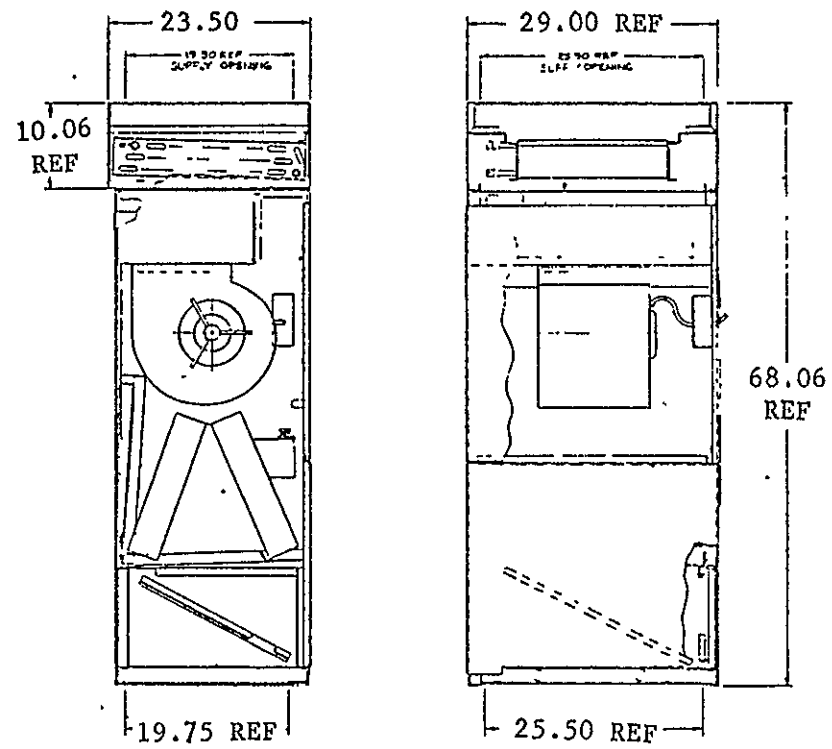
Preliminary Indoor Section 3-Ton HRE Heat Pump
